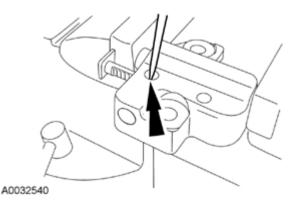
Holding Ratchet Mechanism Using Small Pick Courtesy of FORD MOTOR CO.
